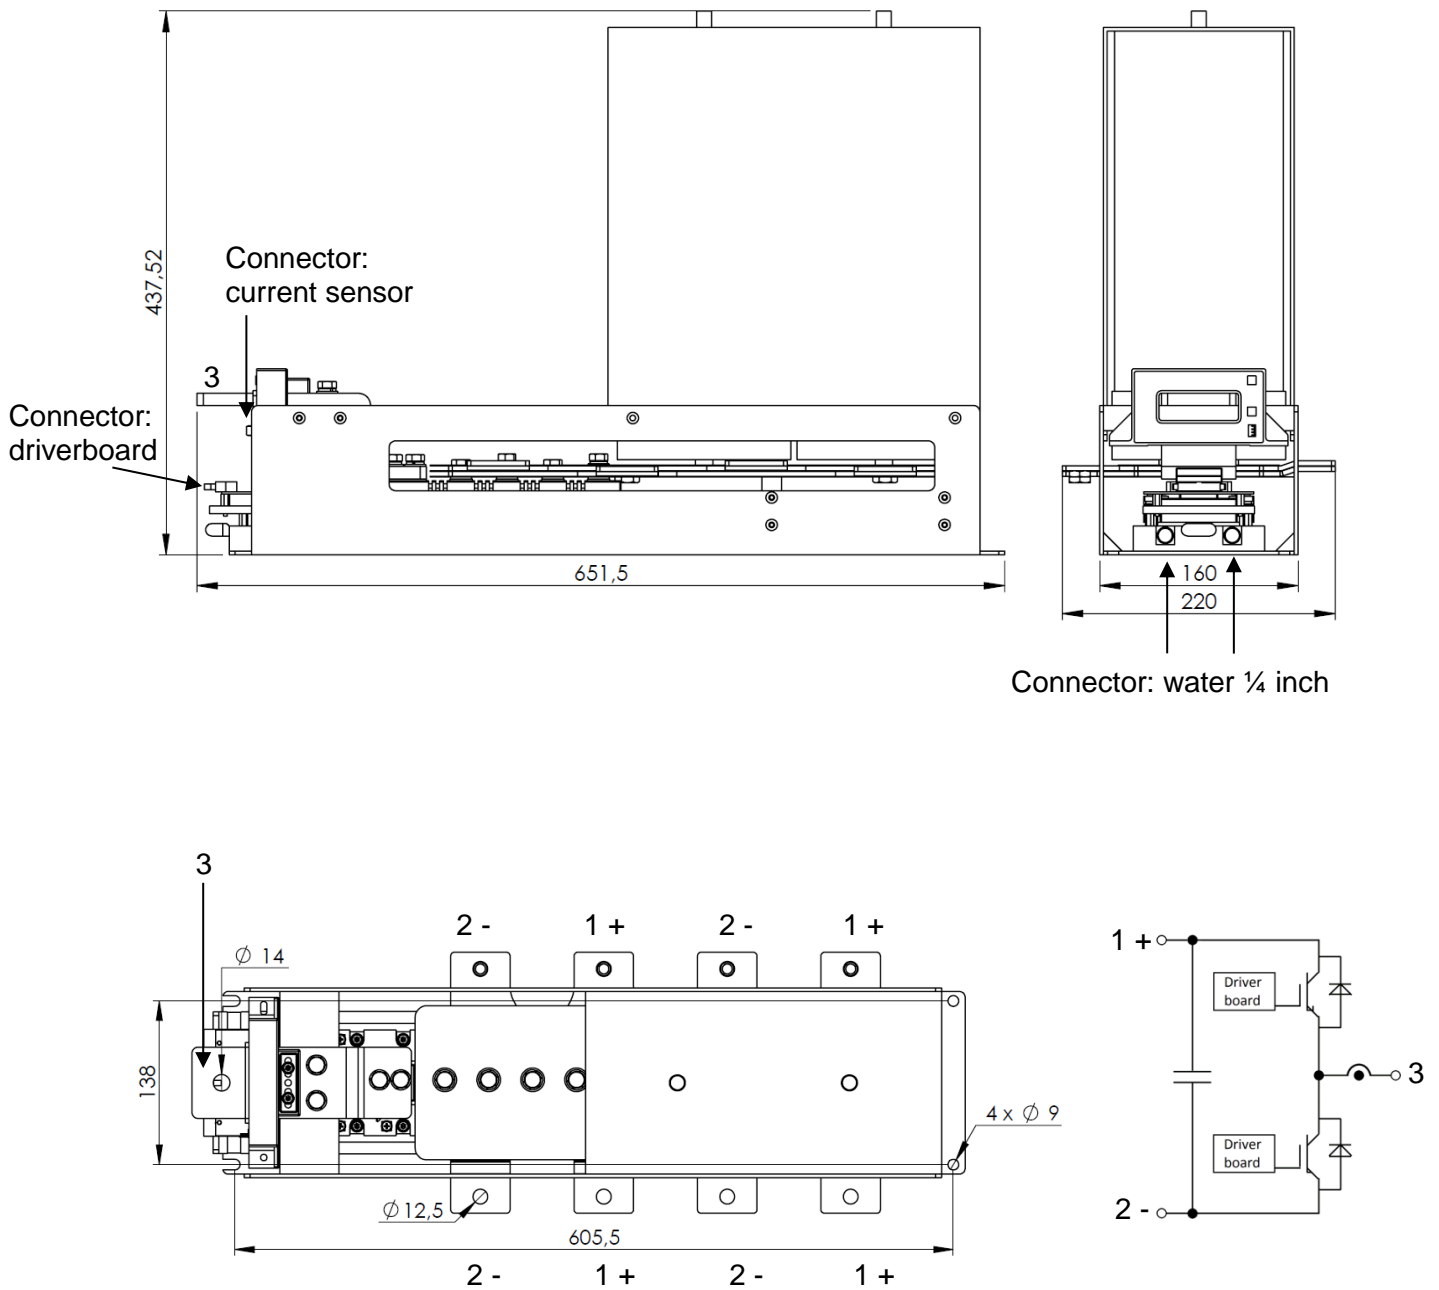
Mechanical drawing of the VARIS™-10-17-W (water cooled)
